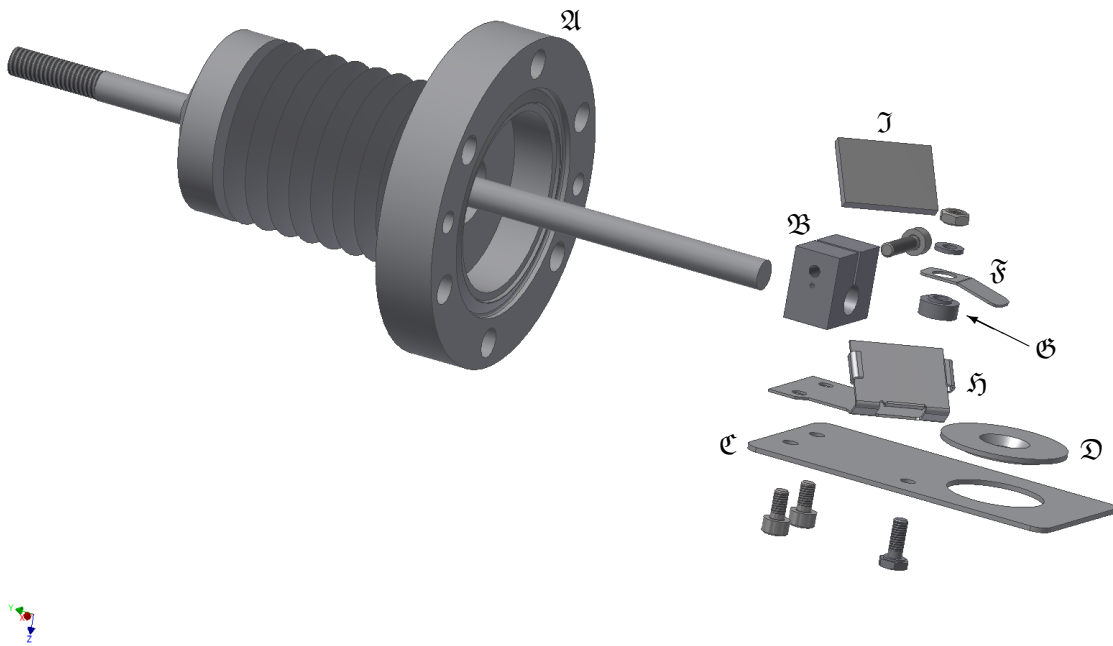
Mirror/Orifice Assembly Vacuum Side — A modified wobble stick^a (A) is equipped with a clamped mounting base (B). This piece carries a holder (C) for an exchangeable orifice (D) held by a small latch (F) with a distance piece (G) as well as a pod (H) made from sheet metal for a mirror^b (I).
